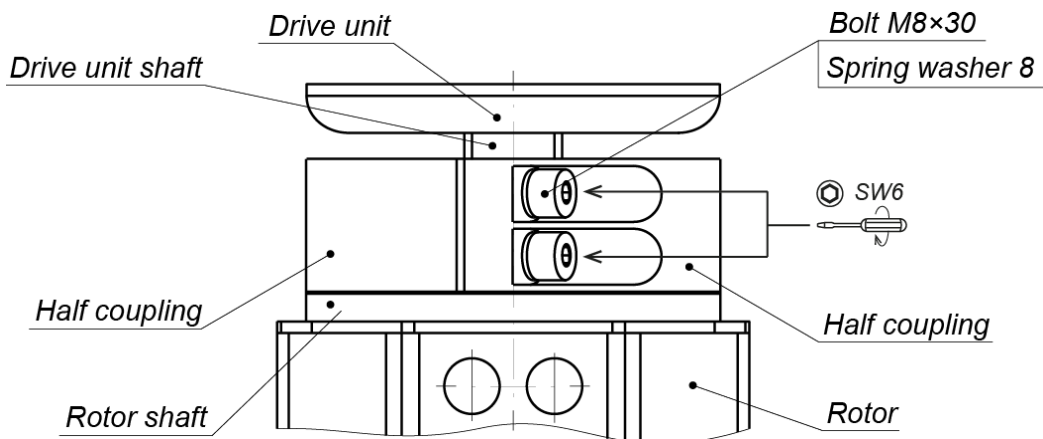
Juncture of the operating mechanism shaft with the rotor shaft by the union joint
